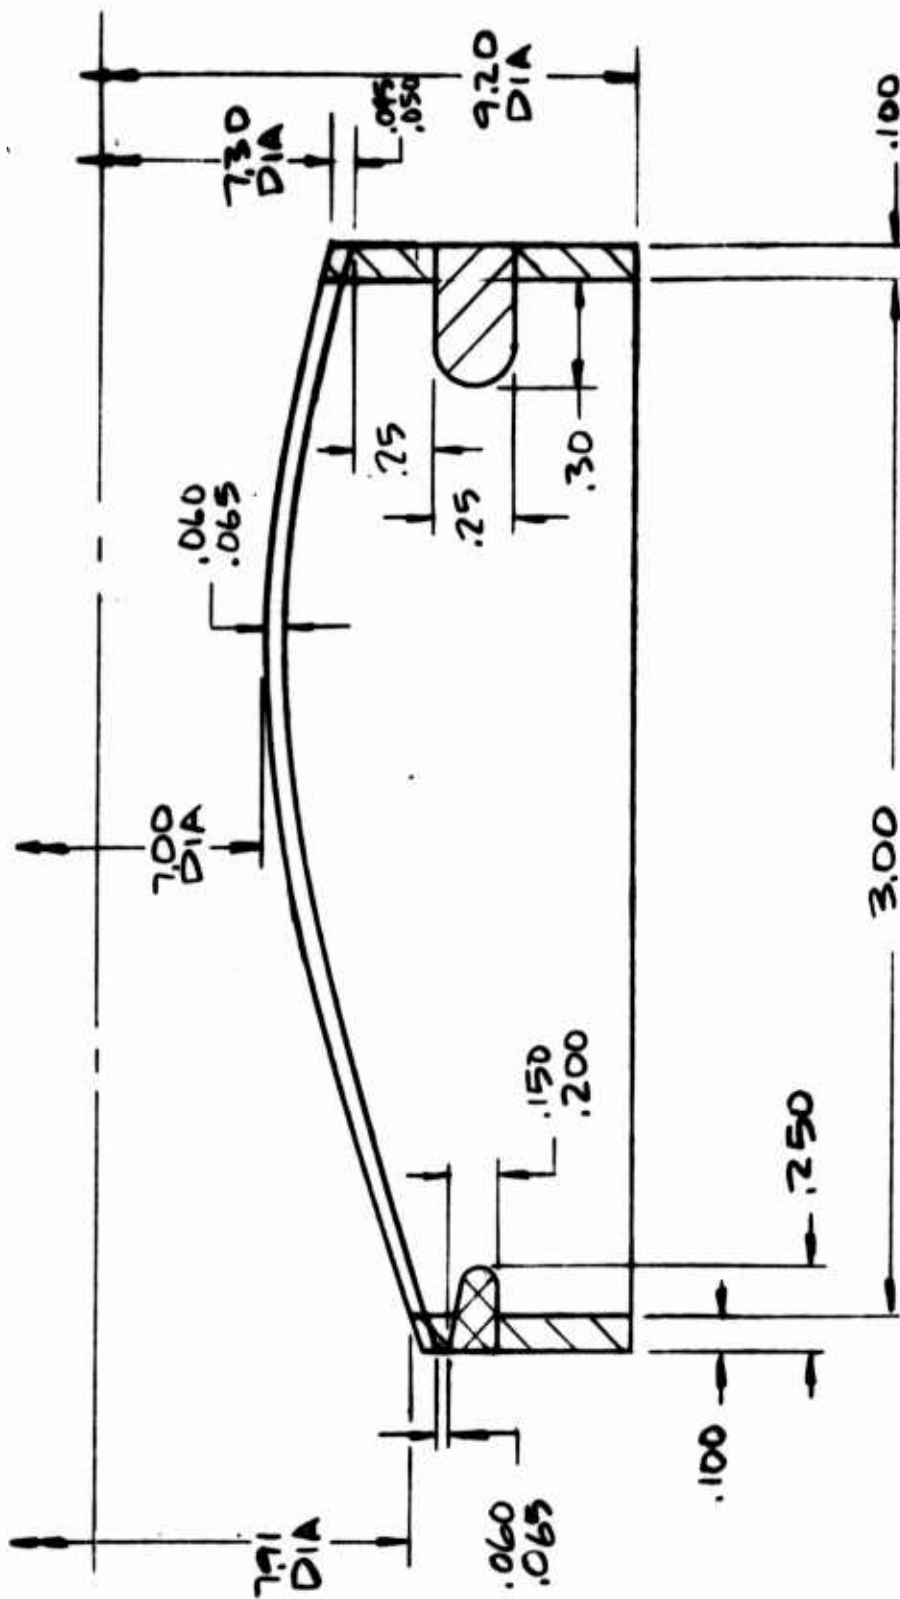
DEFINITION OF NOZZLE THROAT ASSEMBLY
